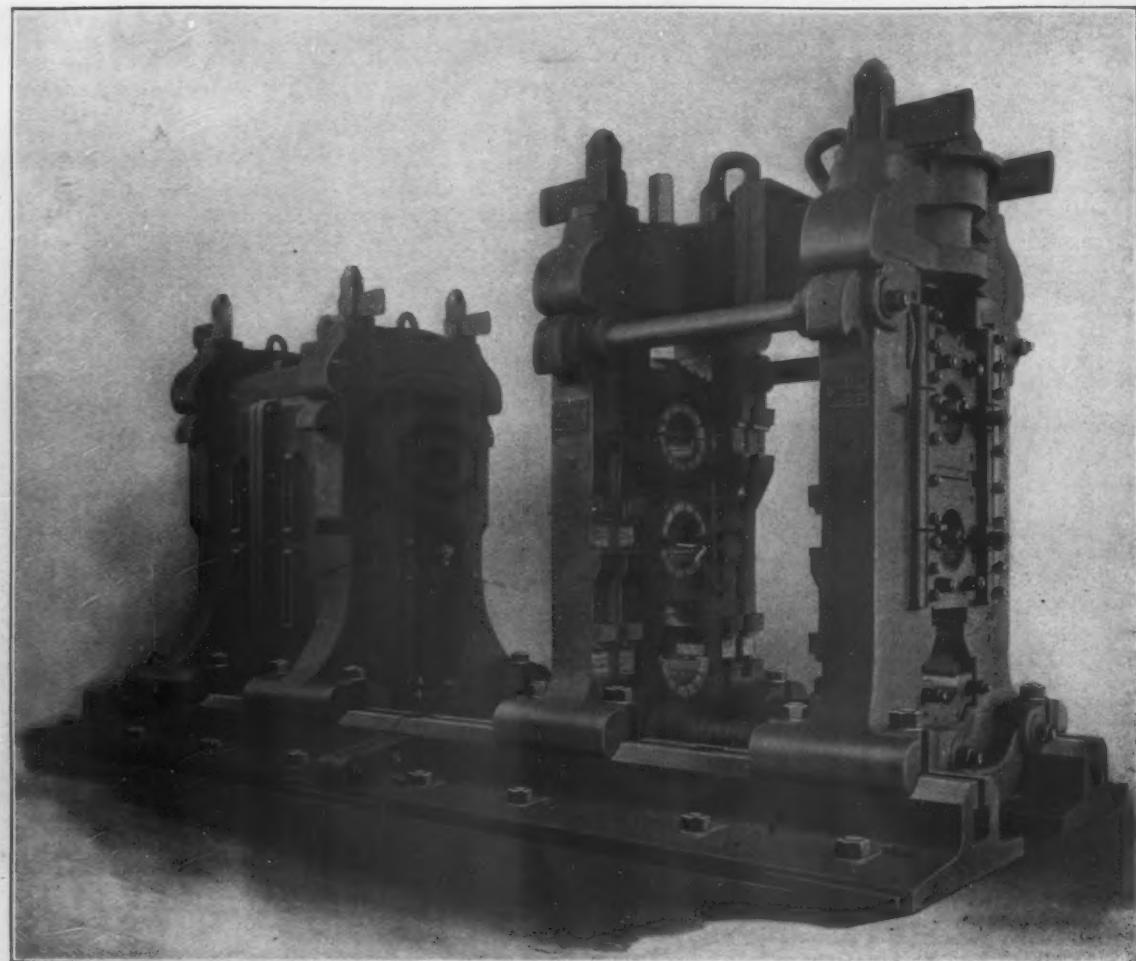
The 40-In. Three-High Blooming Mill Housings.
